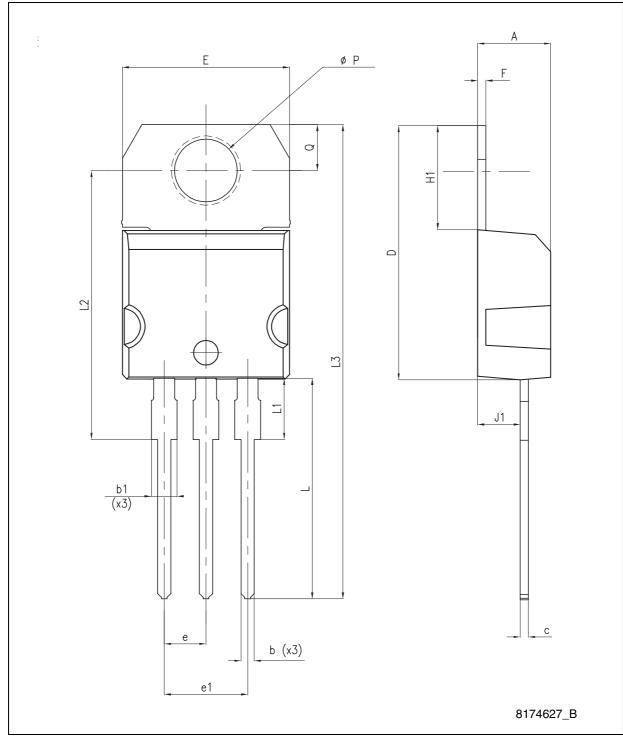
Drawing dimension TO-220 (type STD-ST Single Gauge)
